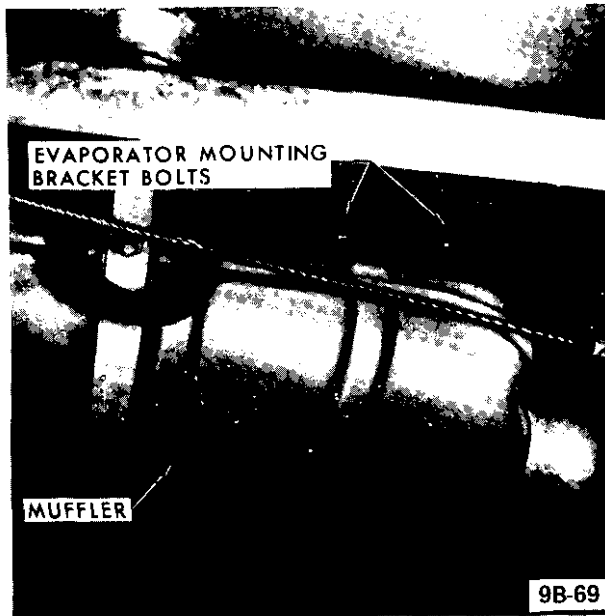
B-206 Evaporator Mounting Bracket Bolts Passenger Side
